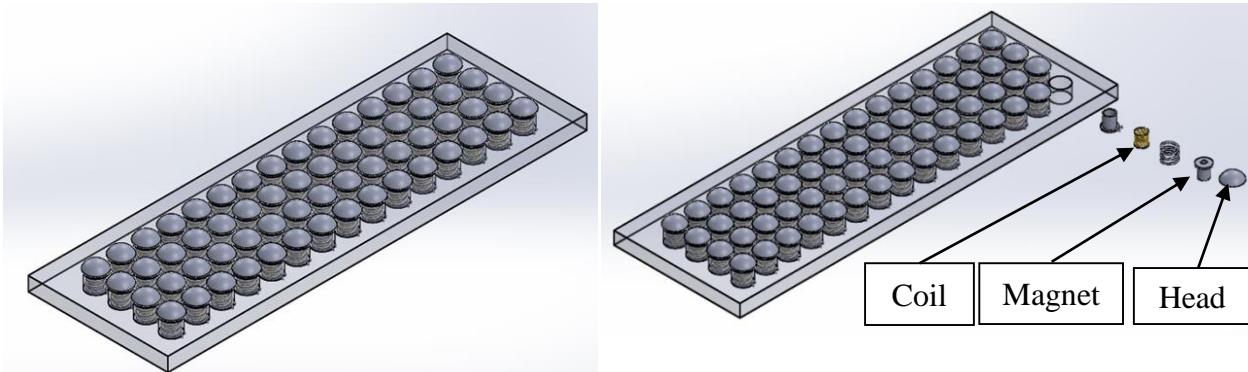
Prototype 3_Configuration (Left) & Exploded View (Right)
